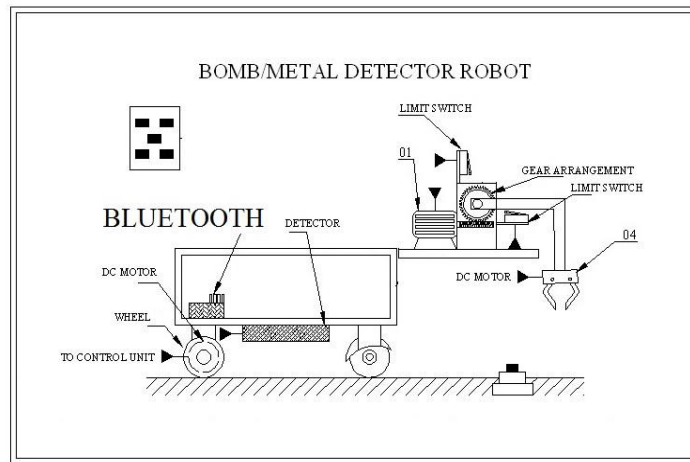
DRAWING FOR BOMB DETECTING ROBOT
